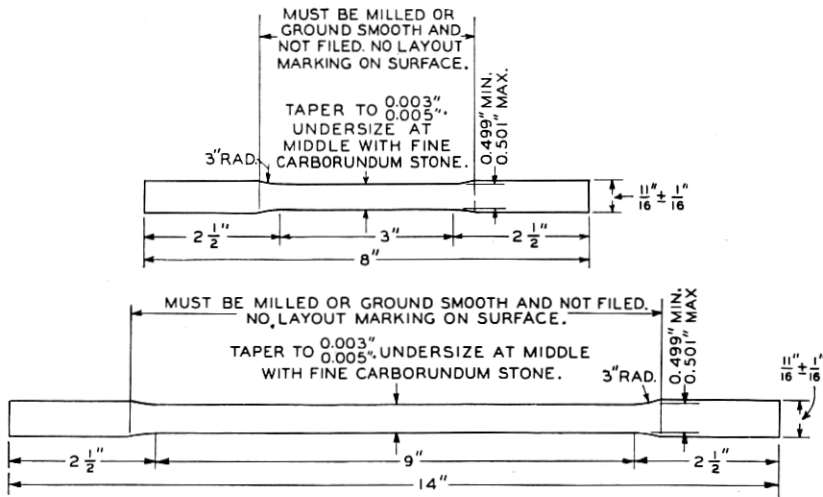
Tension Test Specimens for Sheet Material Over $\frac{1}{2}$ in. in Width.
